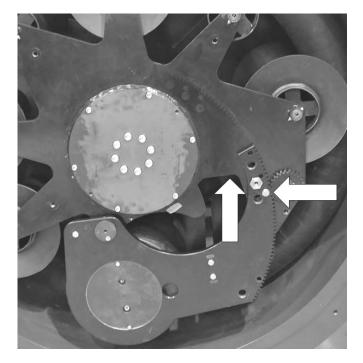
Removing the compression key locking bolt and cradle locking bolts.
